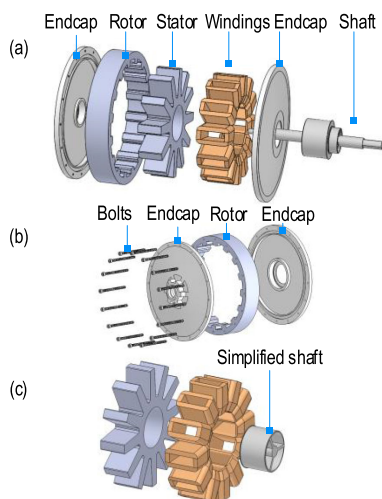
Assembly of the 12/16 E-bike SRM, (a) motor assembly, (b) rotor-endcaps subassembly, (c) stator-shaft-winding subassembly.
